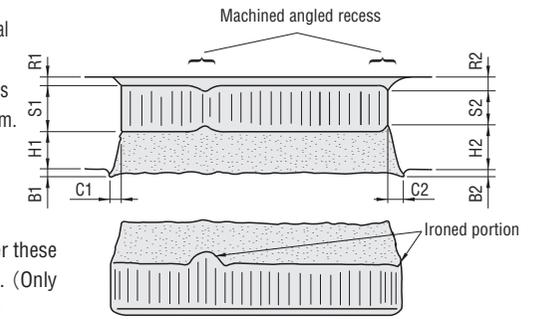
Shear plane shape due to die with countermeasures for scrap retention
